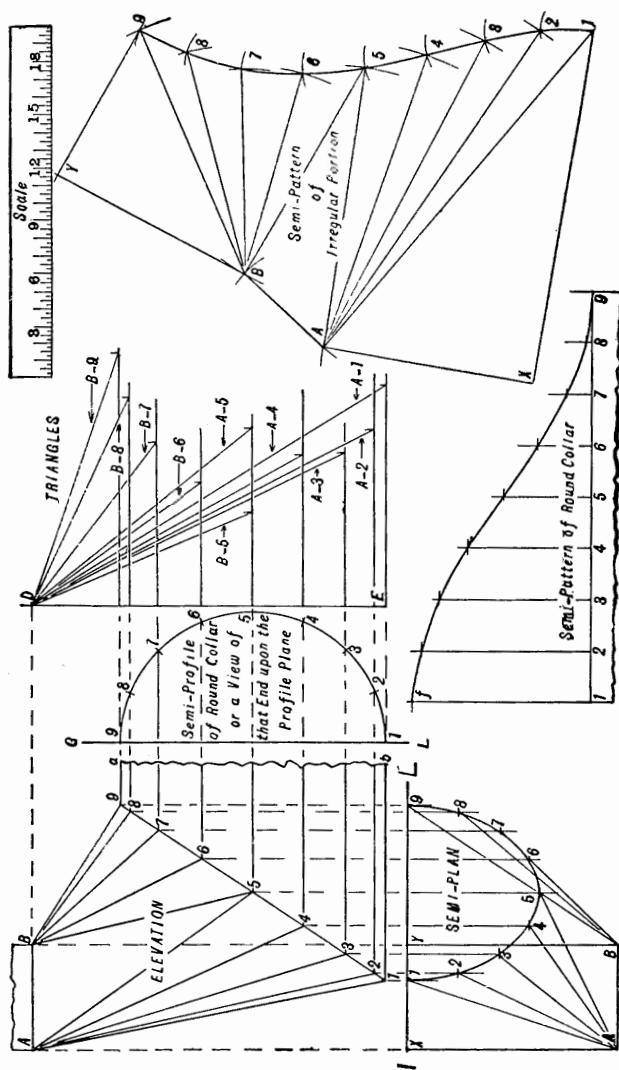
Plan, Elevation and Semi-pattern for a Transition Elbow.
